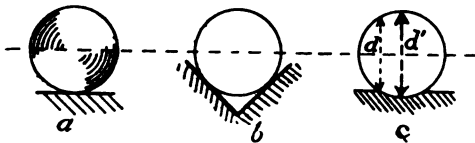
SHOWING SHAPE OF BALL GROOVES.
